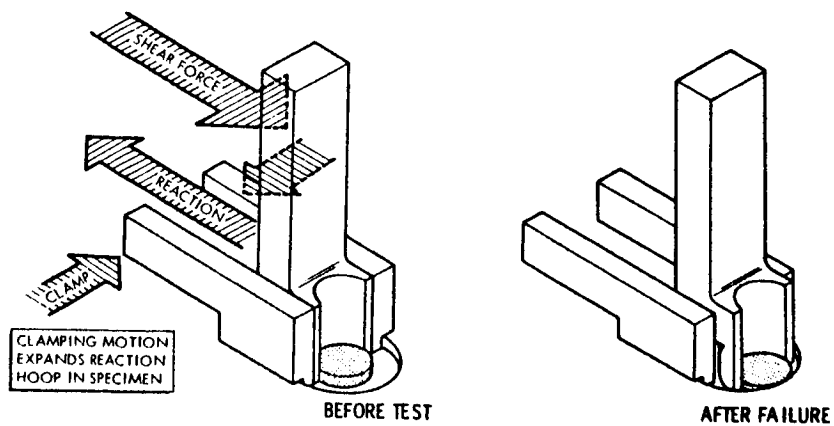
SCHEMATIC DRAWING OF PORTASHEAR SHEAR MECHANISM
